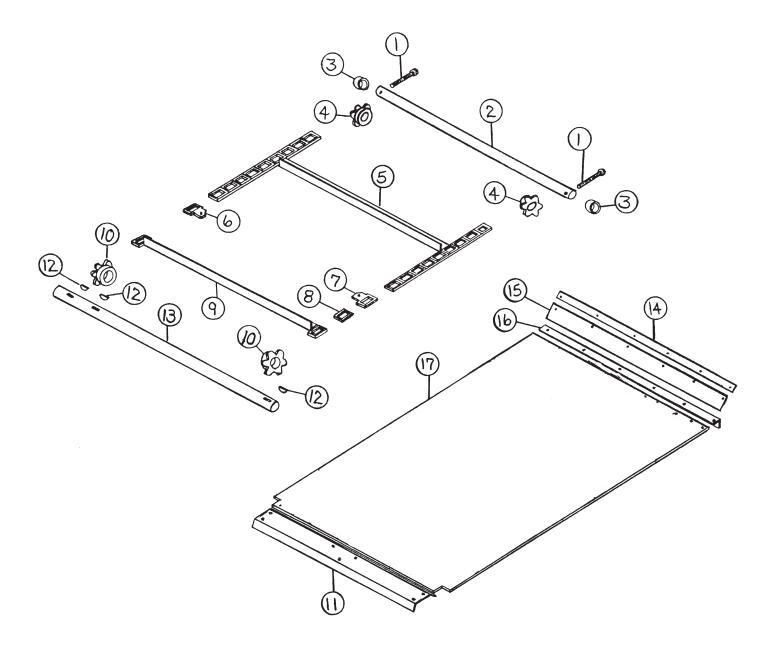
MODEL 80 APRON, CHAIN, SHAFTS & FLOOR
